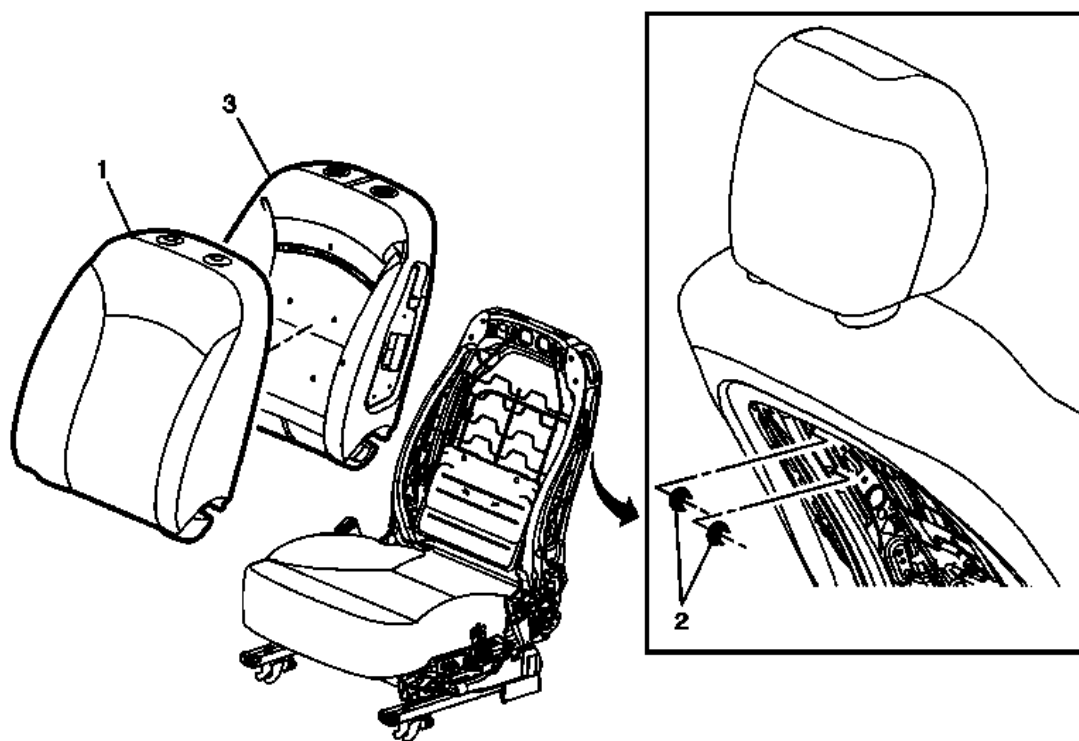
Driver Or Passenger Seat Back Cushion Cover And Pad
